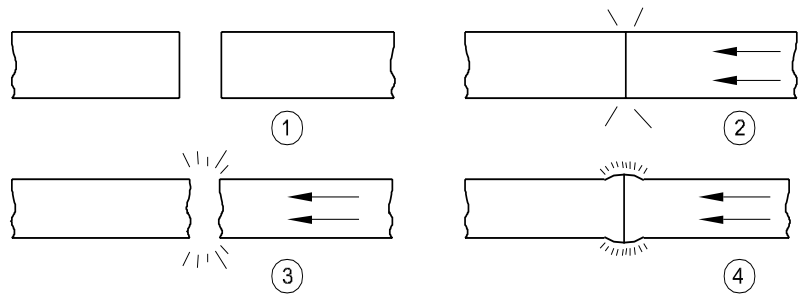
Basic Steps of flash Butt Welding
